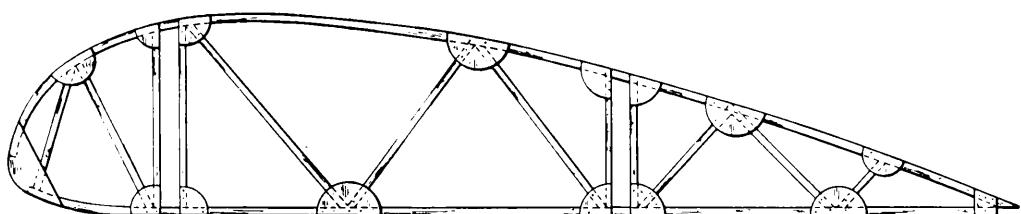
Rib finished and removed from jig. The small pieces of plywood at the joints are called gussets, and serve to strengthen the rib structure.
